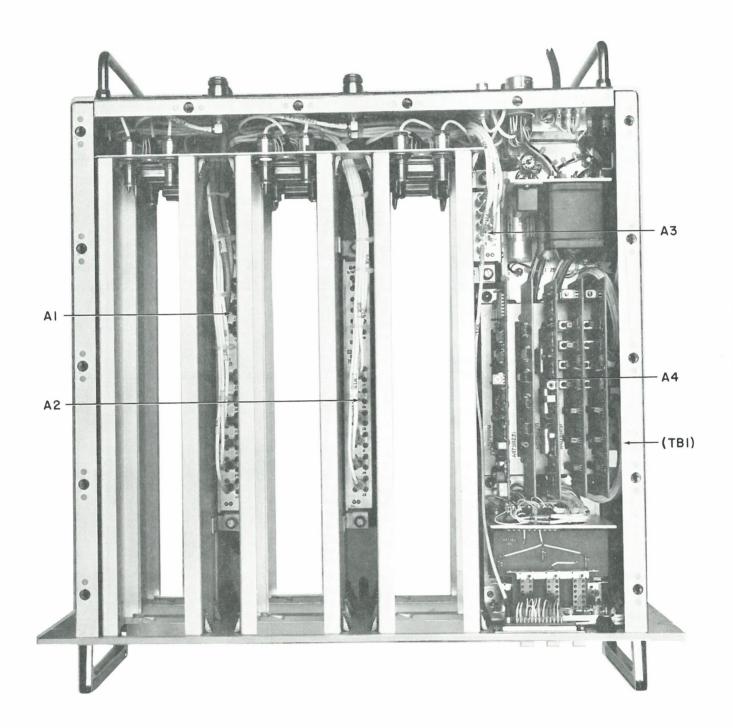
Type CSU-160 Tuner Switching Unit, Top View, Component Locations
